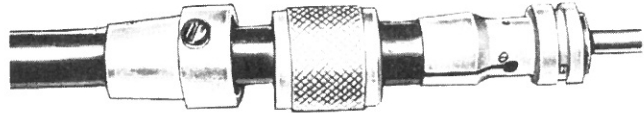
Plug Parts Assembled on Coaxial Cable
